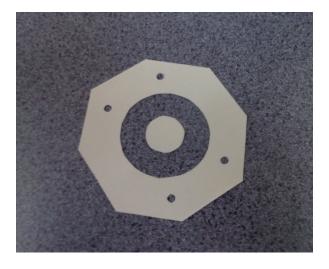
Elastomer gaskets cut to fit test fixture surfaces
